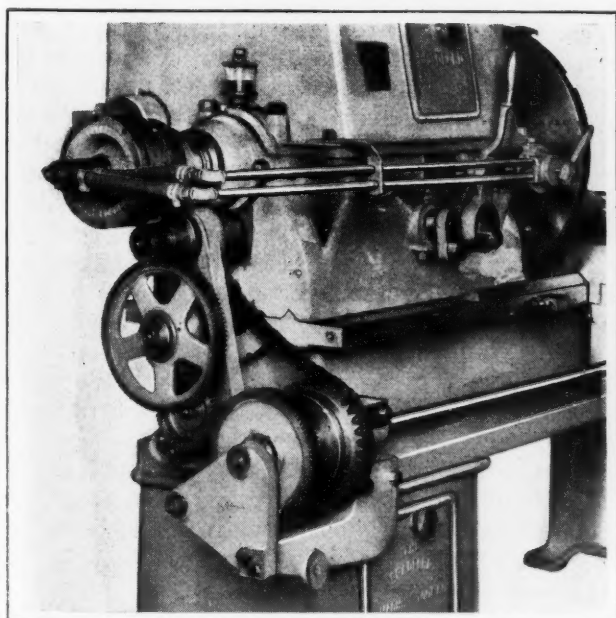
Arrangement of Air Cylinder and Feed and Rapid-return Gearing
